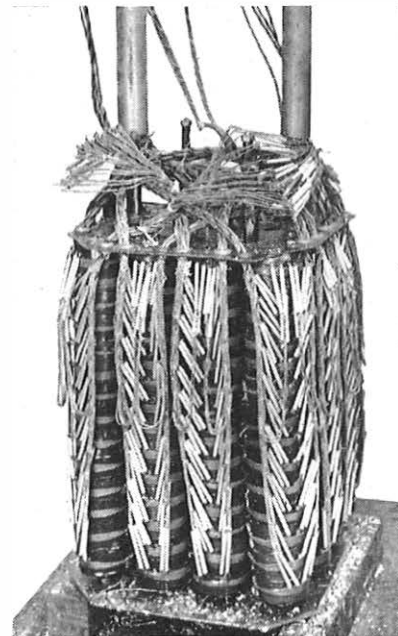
COIL ASSEMBLY ON WHICH JOINTING IS ALMOST COMPLETE
